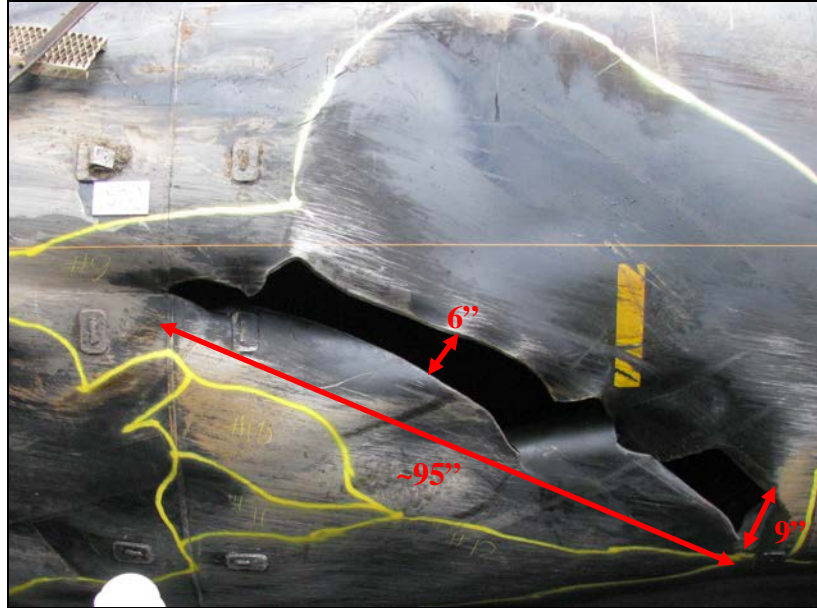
Mechanical tear in shell of CBTX 741712 with dimensions.
